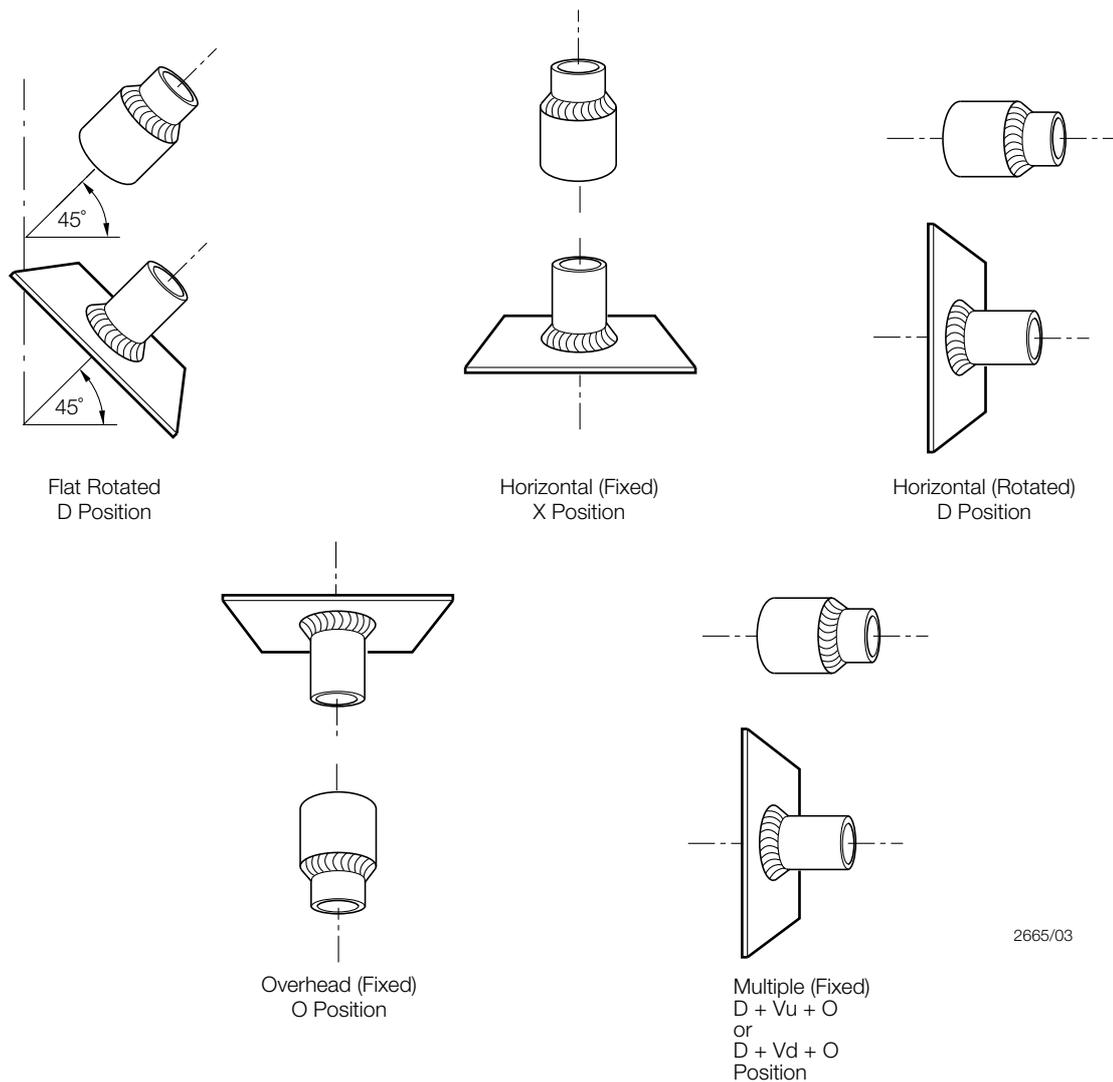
(d) Pipe fillet weld test positions
